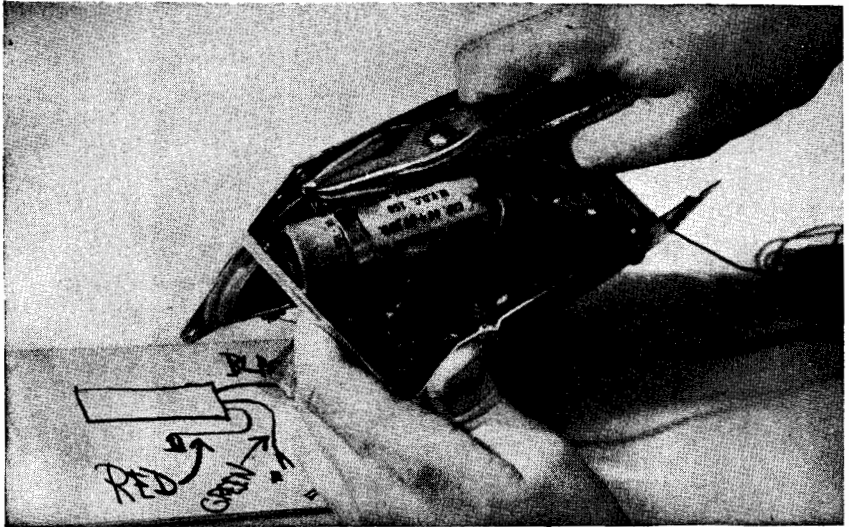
Using pliers to break off the mounting strap of an old tubular electrolytic. The rivet remaining in the chassis can then be cut off with diagonal cutters
